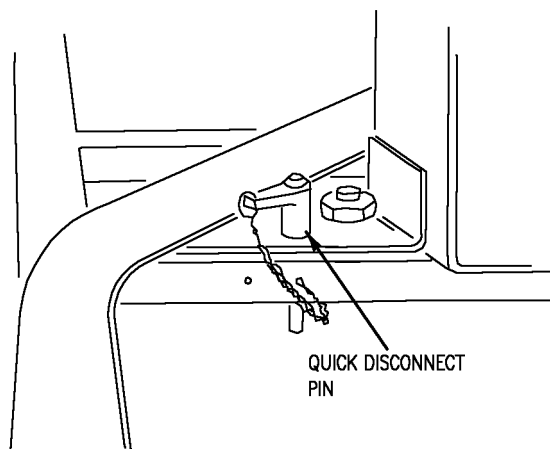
MHU-130/131 Conveyor Quick Disconnect Pin Installation
